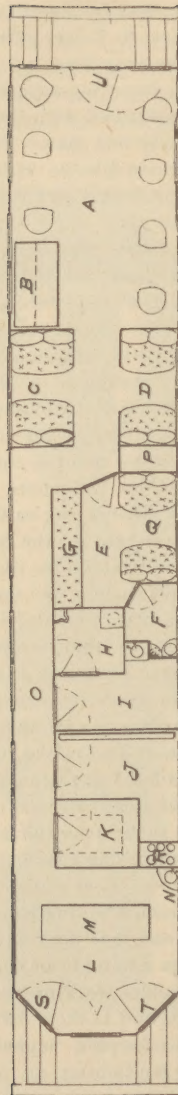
'AMBULANCE CAR—FLOOR PLAN.
